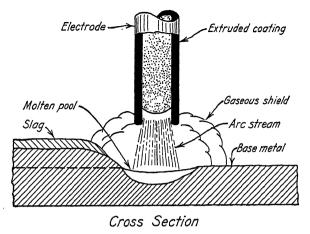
Shielded are electrode. From H. Malcolm Priest, Practical Design of Welded Steel Structures, American Welding Society.
